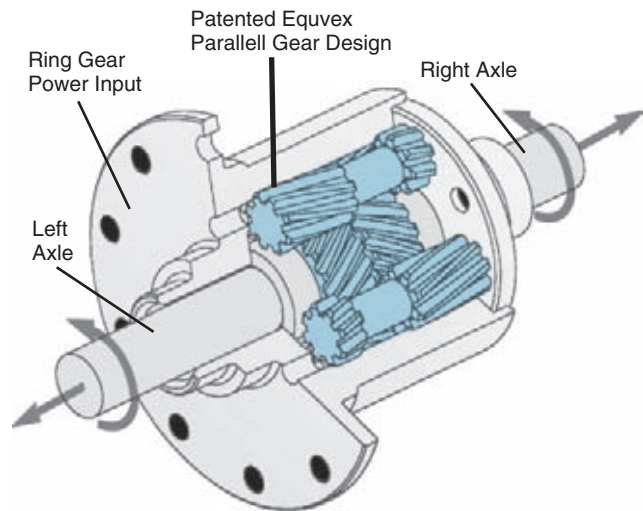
A cutaway view of a Torsen T-2 differential from a drive axle. A transfer case version will have a different housing. Note that the Equivex gear train floats in the outer housing. (Courtesy of Zexel Torsen, Inc.)
